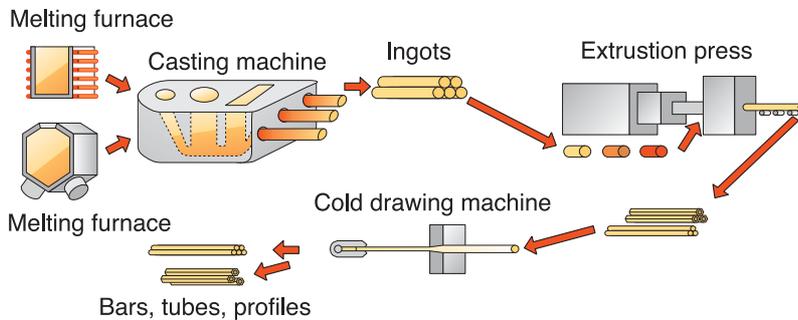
Manufacturing bars by horizontal continuous casting and extrusion.
